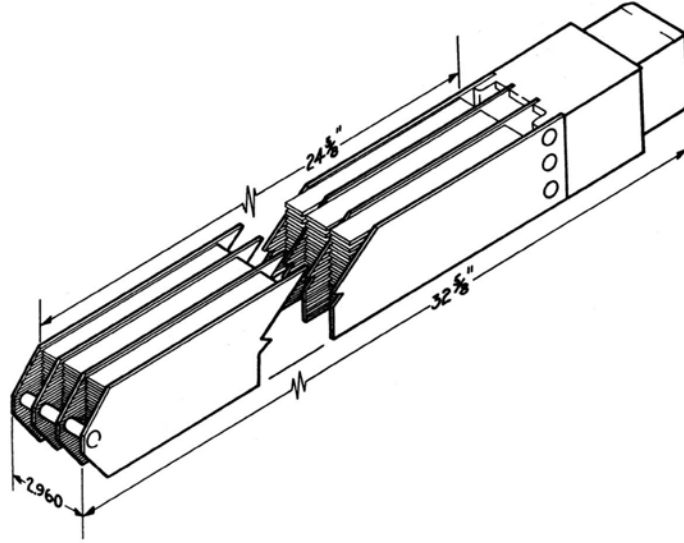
Spert I Type-A Fuel Assembly (Ref. A-3)
